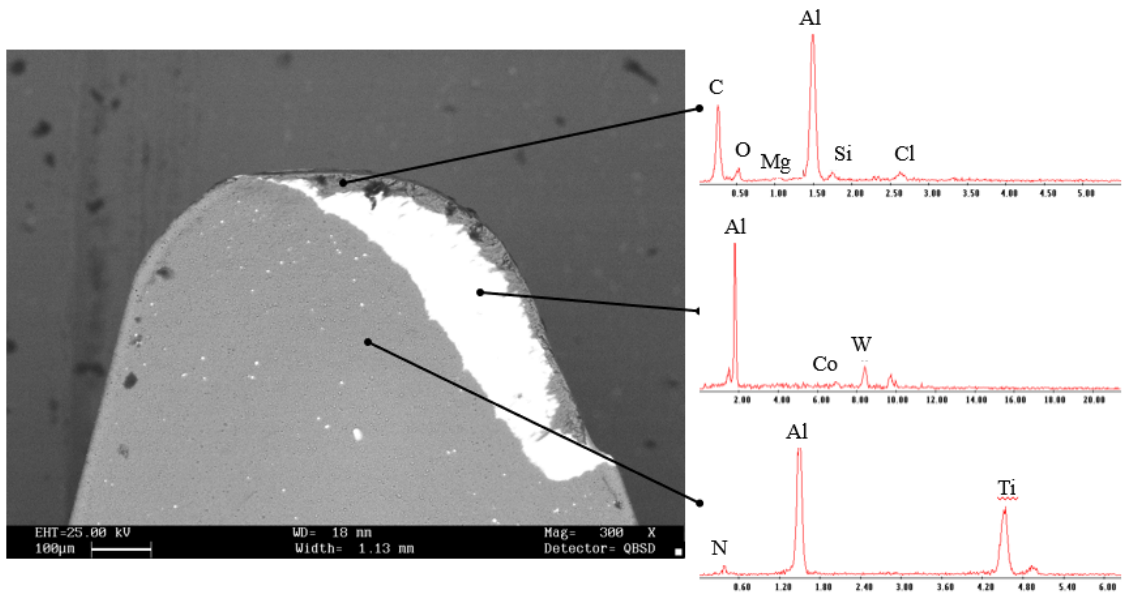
Tool before etching: feed of  $f = 0,06 \text{ mm rev}^{-1}$ , cutting speed of  $V_c = 60 \text{ m min}^{-1}$  and material removal of  $MR = 660 \text{ mm}^3$  using conventional turning
